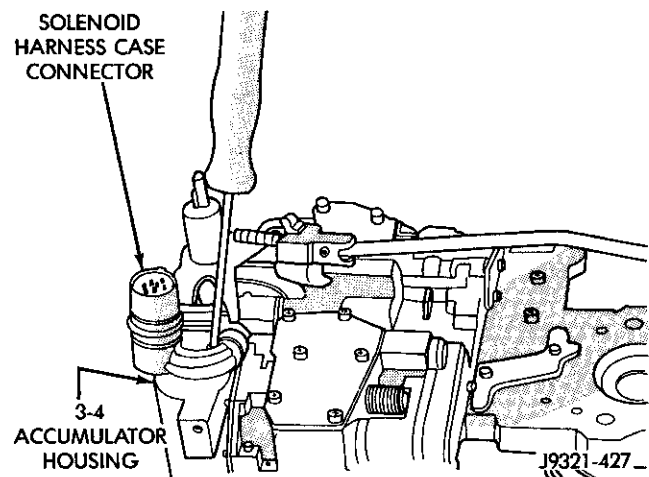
Solenoid Harness Case Connector Shoulder Bolt
